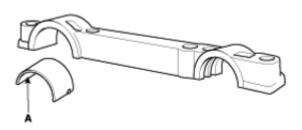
Identifying Exhaust Camshaft Upper Bearing Courtesy of HYUNDAI MOTOR CO.
